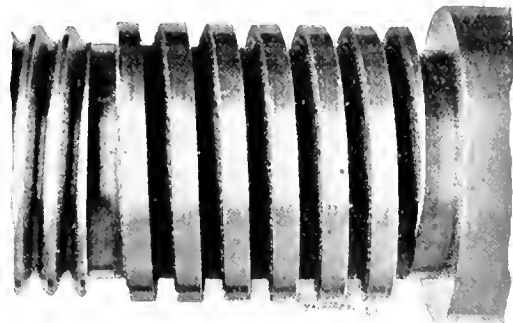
A Square Thread roughed with the Rack Feed and partly finished with the Lead-screw.
